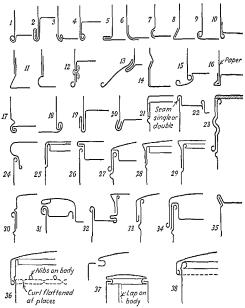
Attachment of tops and bottoms to sheet-metal container. (Mills.13)
